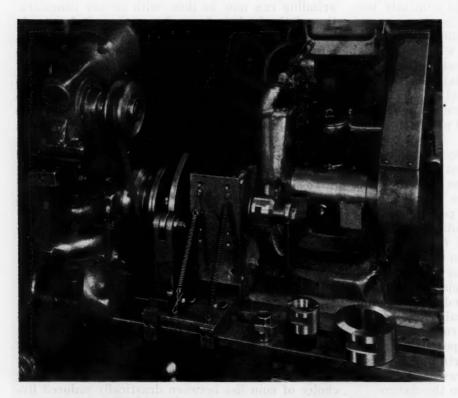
Front View of Grinding Fixture, Showing Cam-plate and Roller by Means of which Work-spindle is Oscillated
